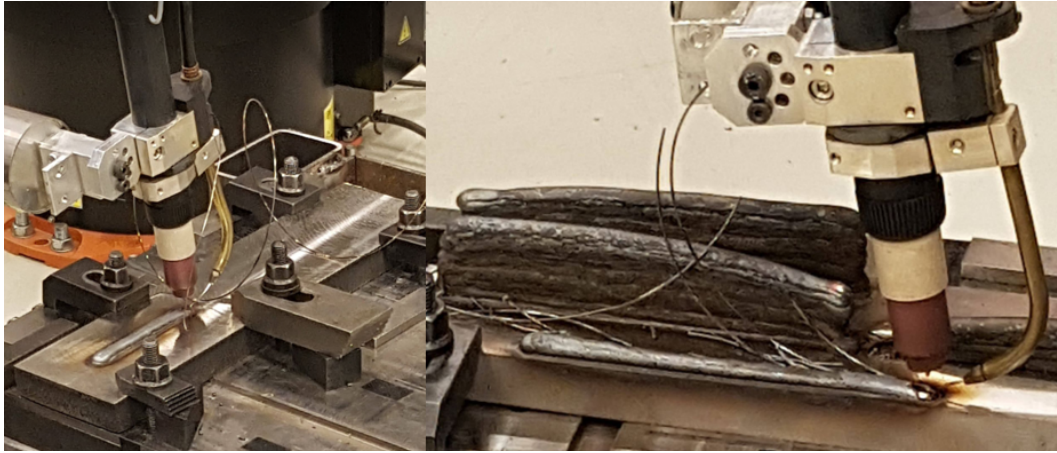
Two cases of wire feed error. Source: Picture from the welding experiment
